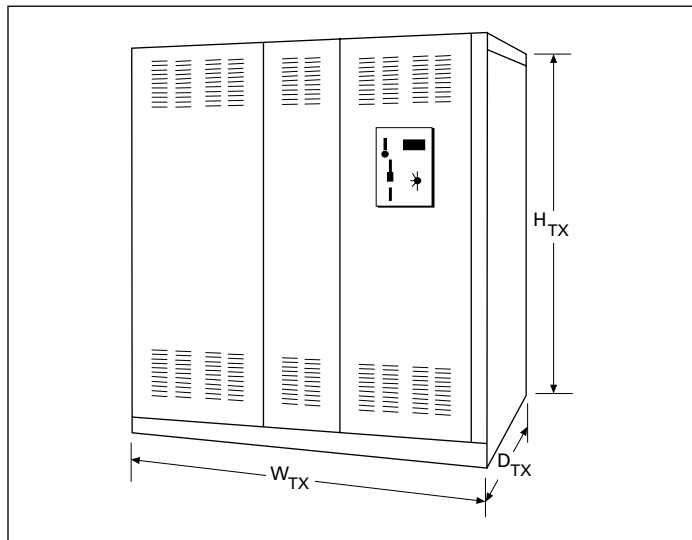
Indoor Ventilated Enclosure (NEMA 1 Construction)
